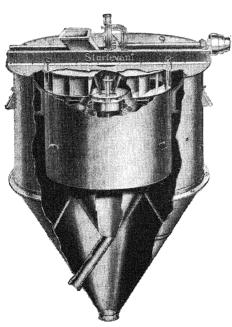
AIR SEPARATOR CUT TO SHOW INNER WORKING PARTS
